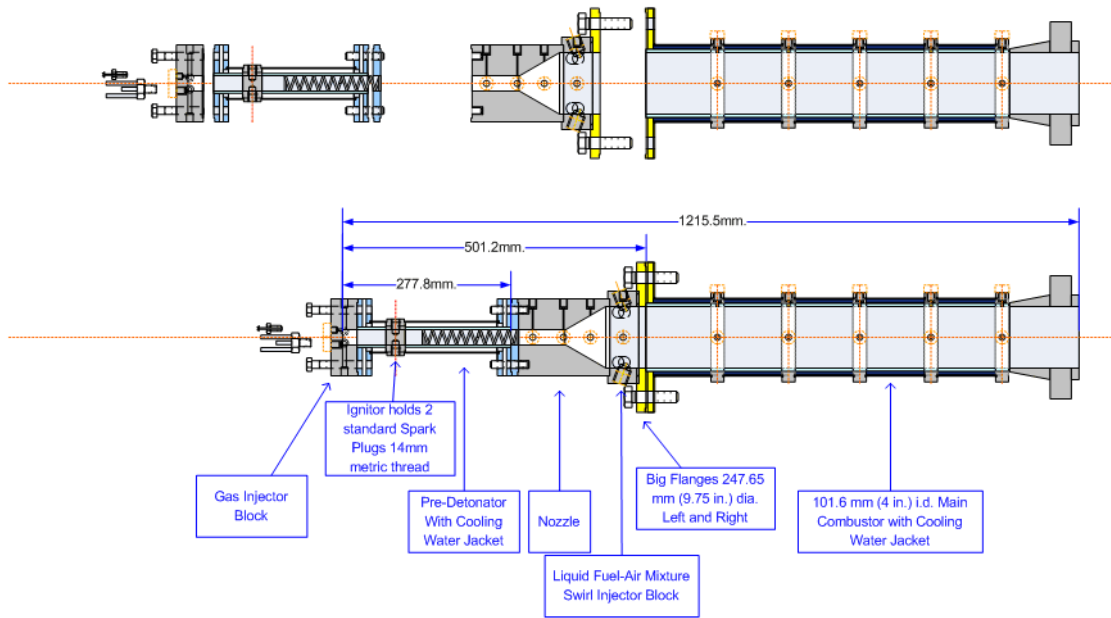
Schematic of the dual-stage PDE showing the various parts. All dimensions indicated are in millimeters.
